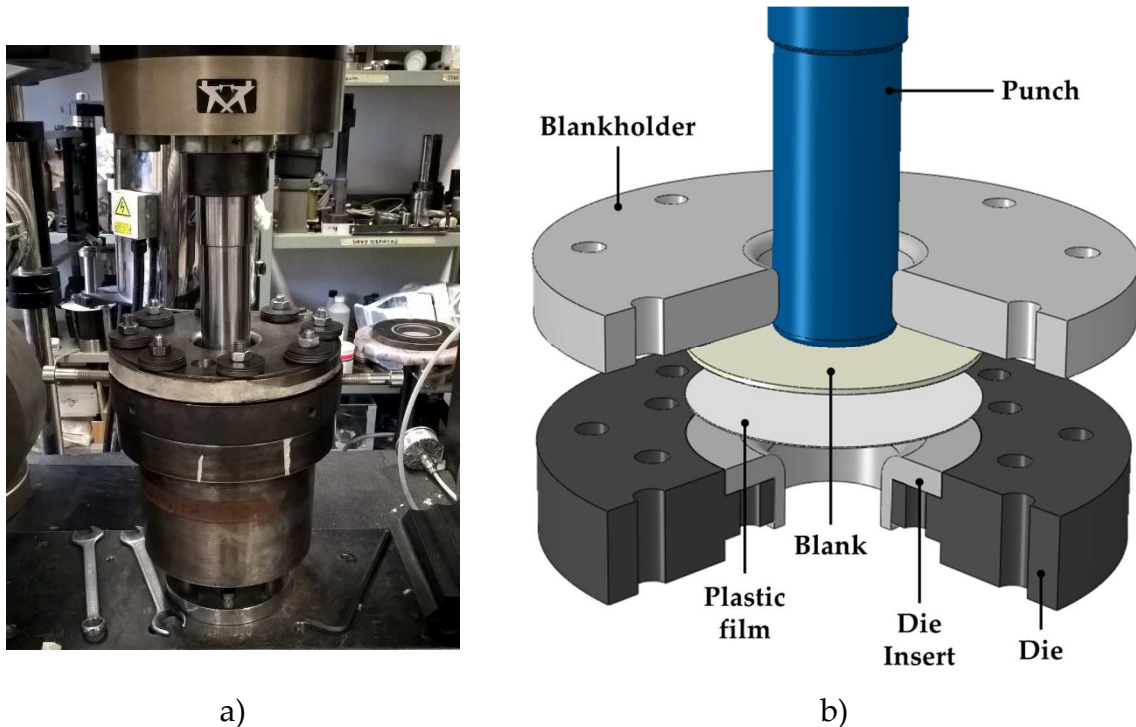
Deep drawing equipment: a) experimental setup, b) 3D representation of the components
